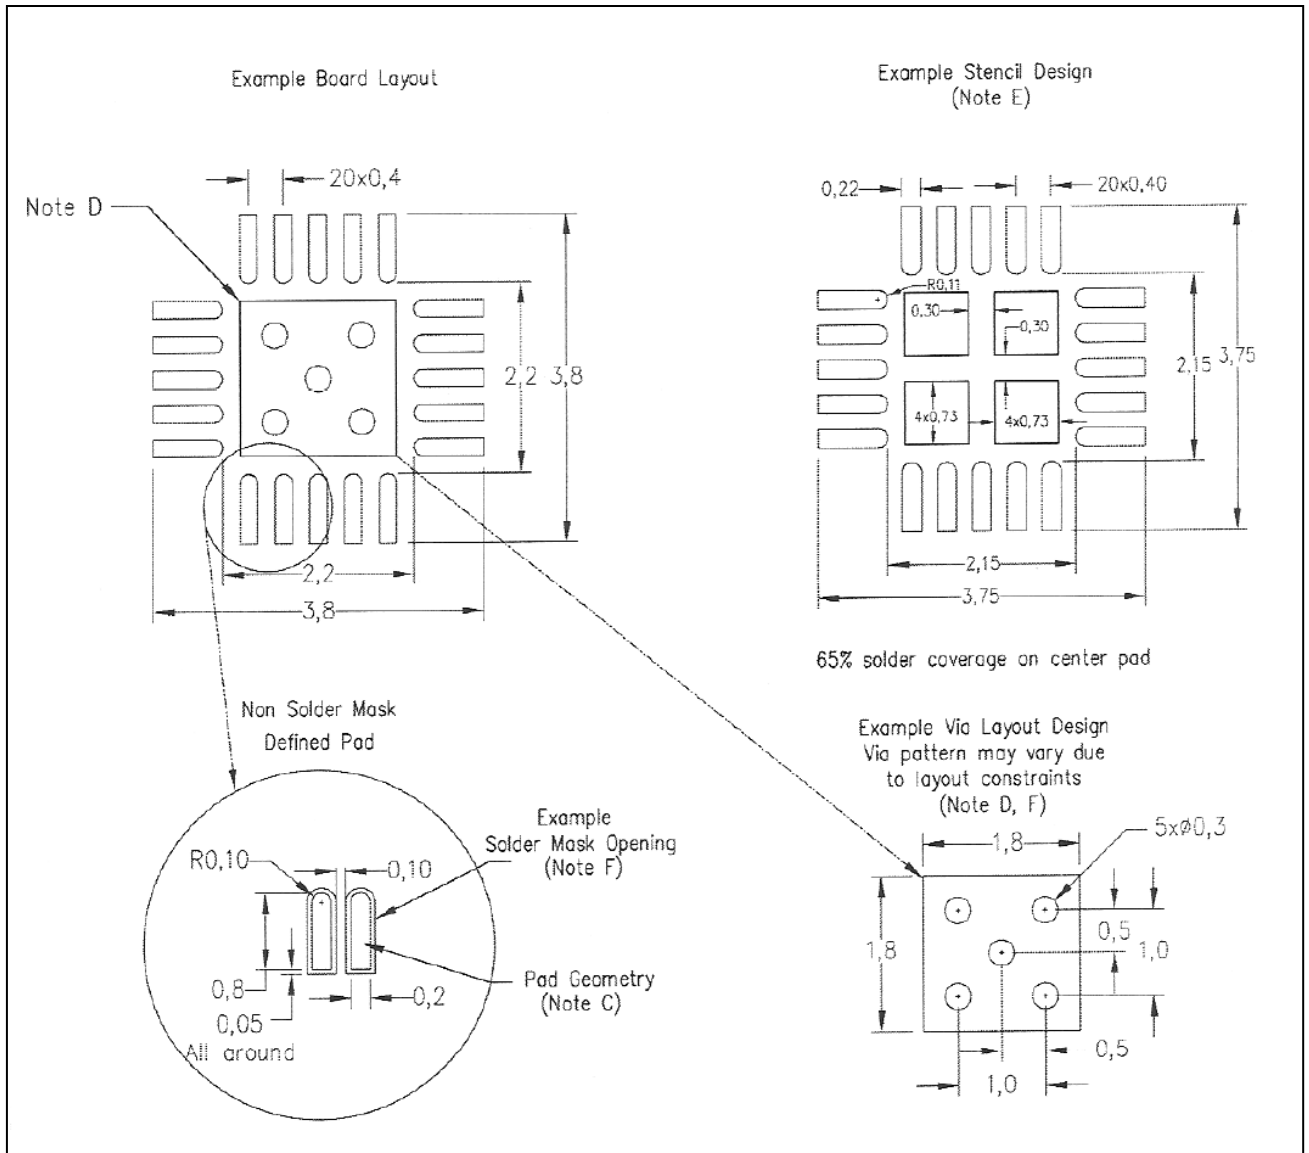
TRX_024_06 Package Footprint and Example Stencil Design
